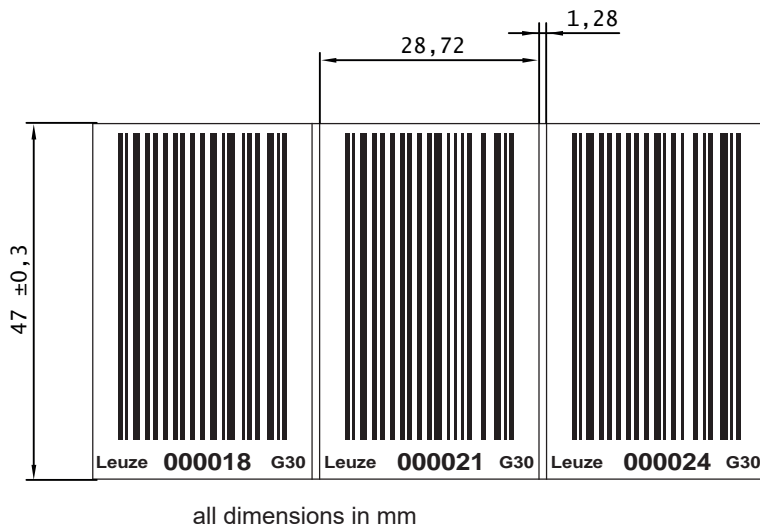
Dimensioned drawing BCB G30 ... bar code tape with 30 mm grid
